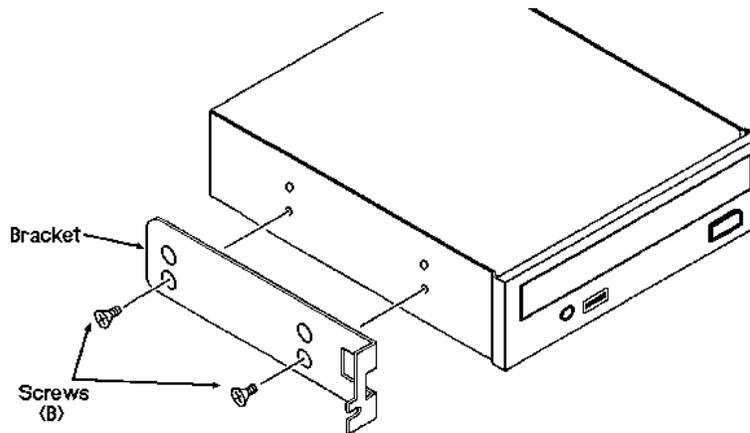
ATTACH MOUNTING BRACKET TO CD-ROM DRIVE.
